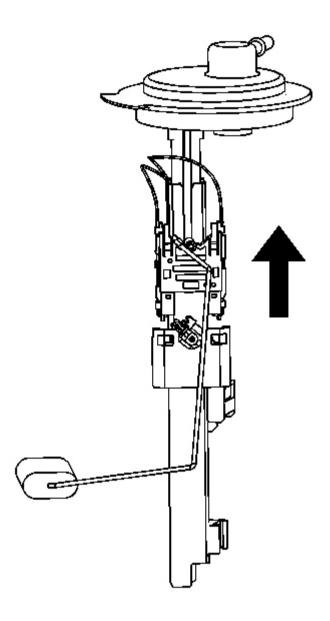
View Of Fuel Level Sender Unit & Float Onto The fuel Pump Module Courtesy of GENERAL MOTORS CORP.
